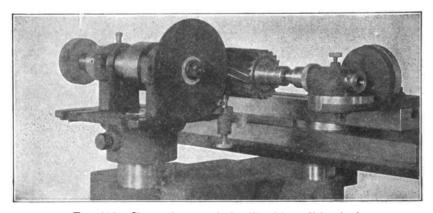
Sharpening a spiral mill with a disk wheel.
